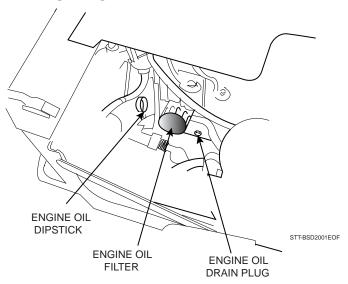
Engine Dipstick, Filter, Oil Drain
